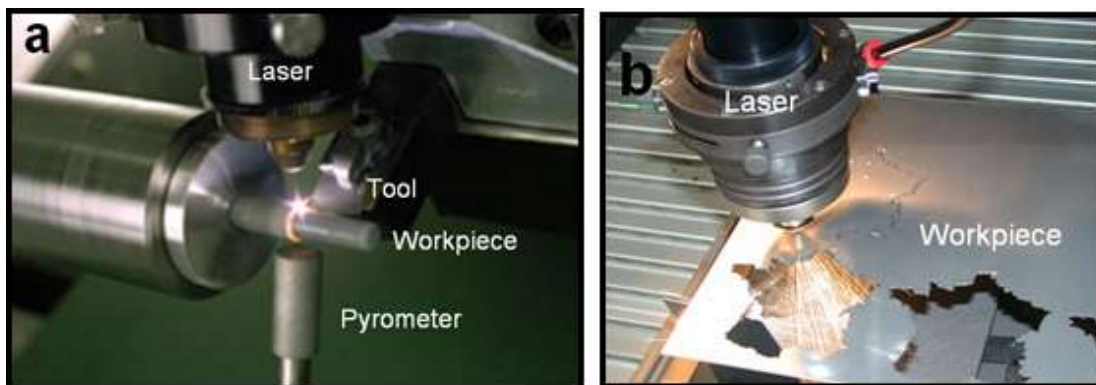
a) Laser assisted machining [32] b) Laser machining [35].
